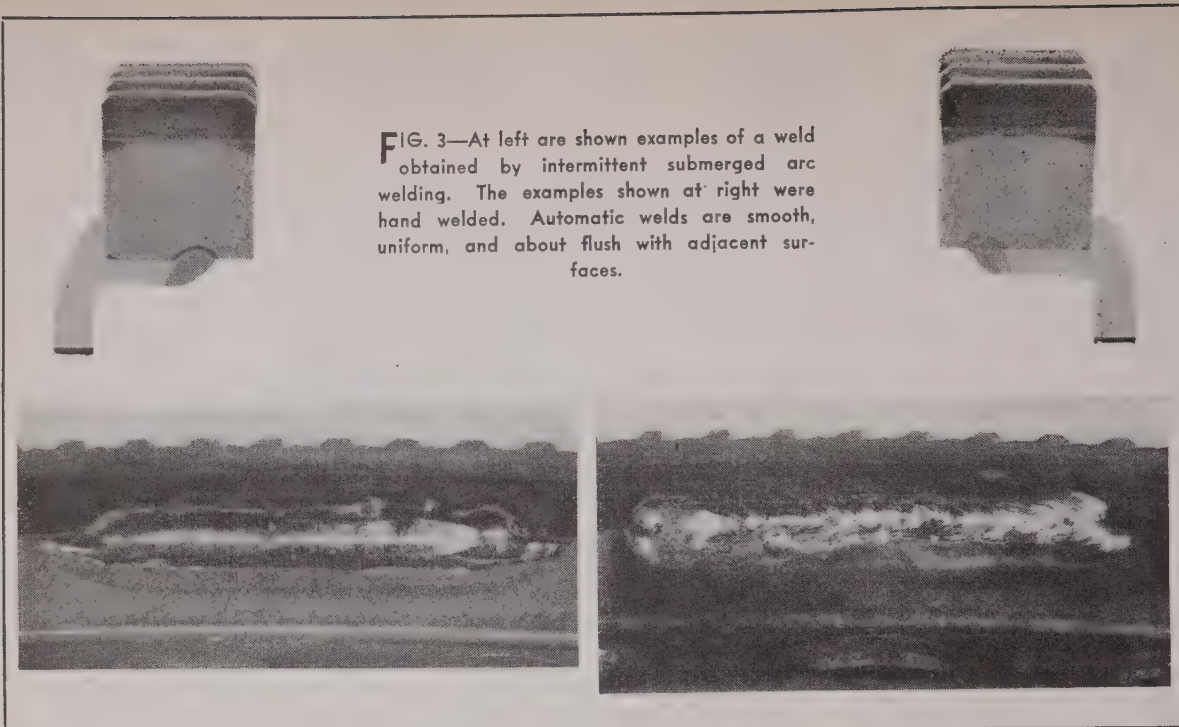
At left are shown examples of a weld obtained by intermittent submerged arc welding. The examples shown at right were hand welded. Automatic welds are smooth, uniform, and about flush with adjacent surfaces.
